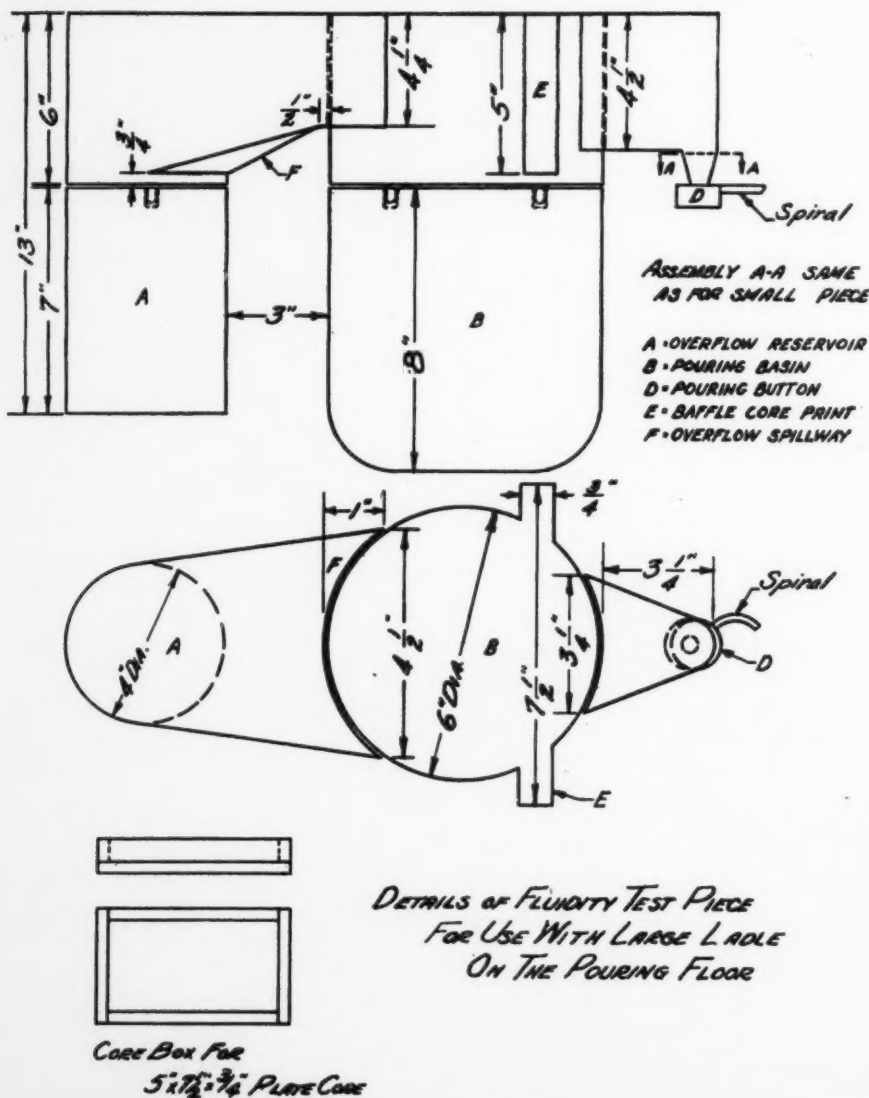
Details of Fluidity Test Piece for Use with Large Ladle on Pouring Floor.
